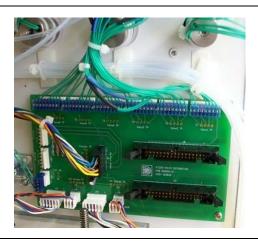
Switching Valve Connectors on Valve Distribution PCB
